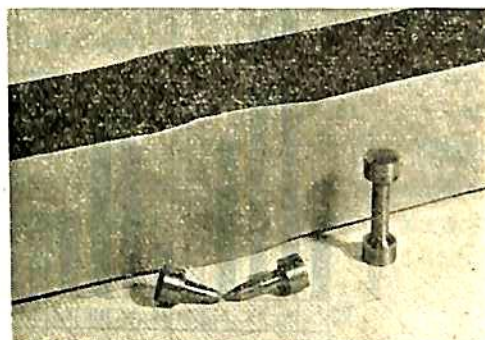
SMALL TENSION TEST SPECIMENS, 3 MM DIA AND 20 MM LENGTH, TAKEN FROM WELDED JOINT, 25 MM THICK ¹¹⁾
